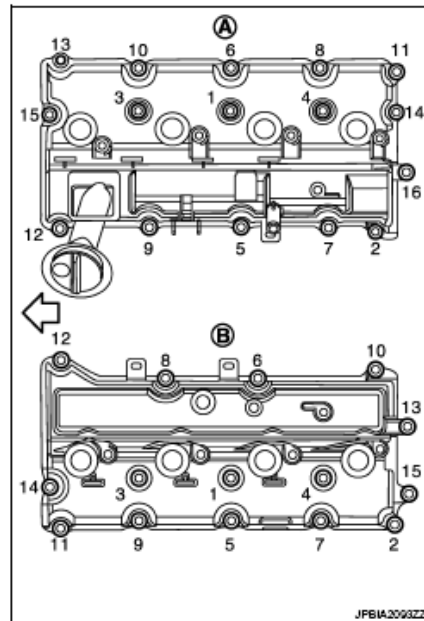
Identifying Rocker Cover Bolt Loosening Sequence
